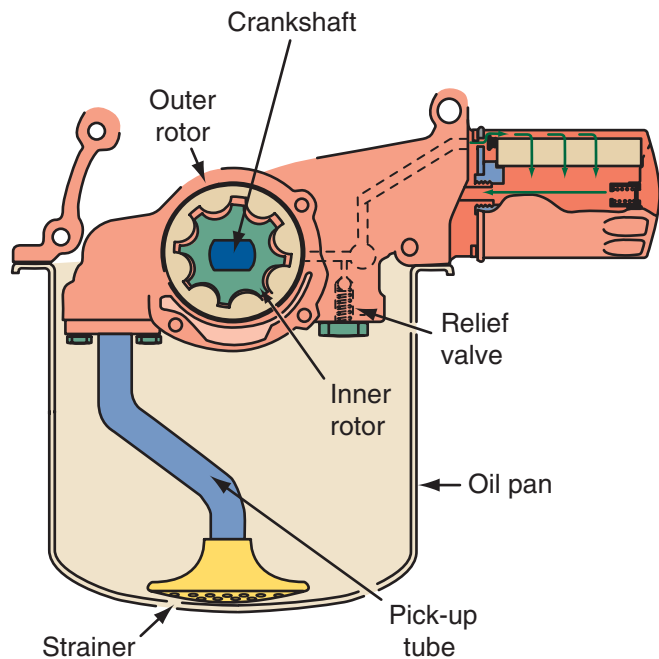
A typical oil pump driven by the crankshaft.
